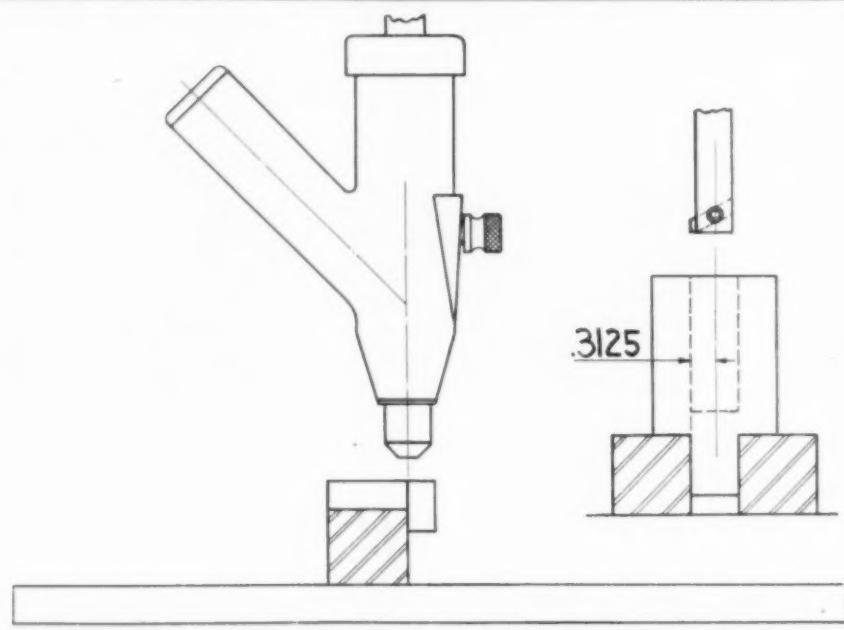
left—Job is to locate holes for re-boring a fixture. Edge Block is set on parallel. Center Scope set in spindle is checked for run-out (see Fig. 2). The spindle center is then set to correspond to face of parallel. Figure 4, right—Workpiece is set on parallels. Spindle is located for boring by moving table exactly half diameter of hole to be bored. Locating time: 2 minutes. Allowed tolerances: .005-inch. Actual tolerance: .0001-inch.
